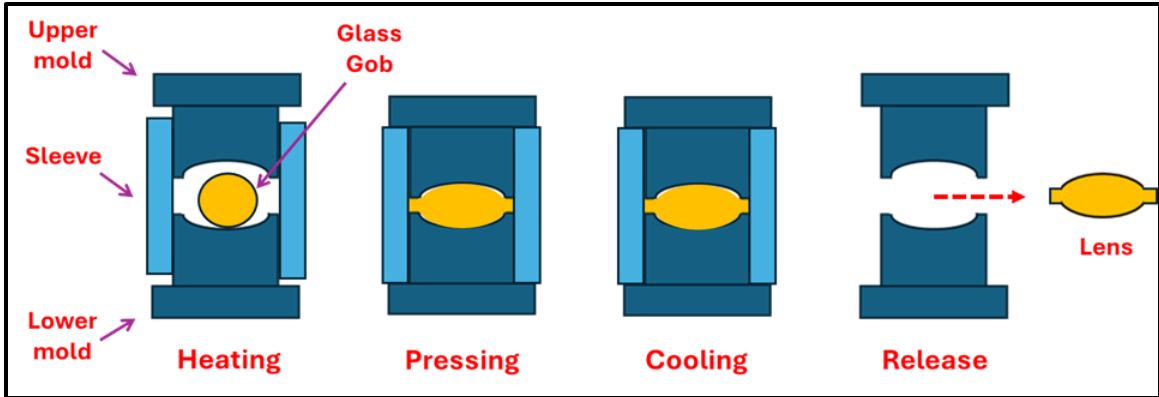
Basic PGM (Precision Glass Molding) process
